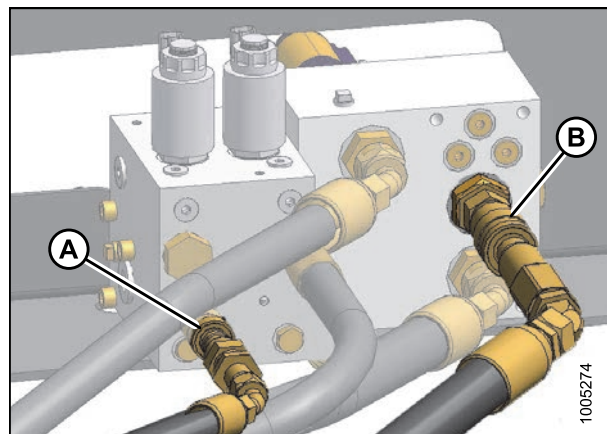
M150/M155/M155E4 without Reverser Valve
